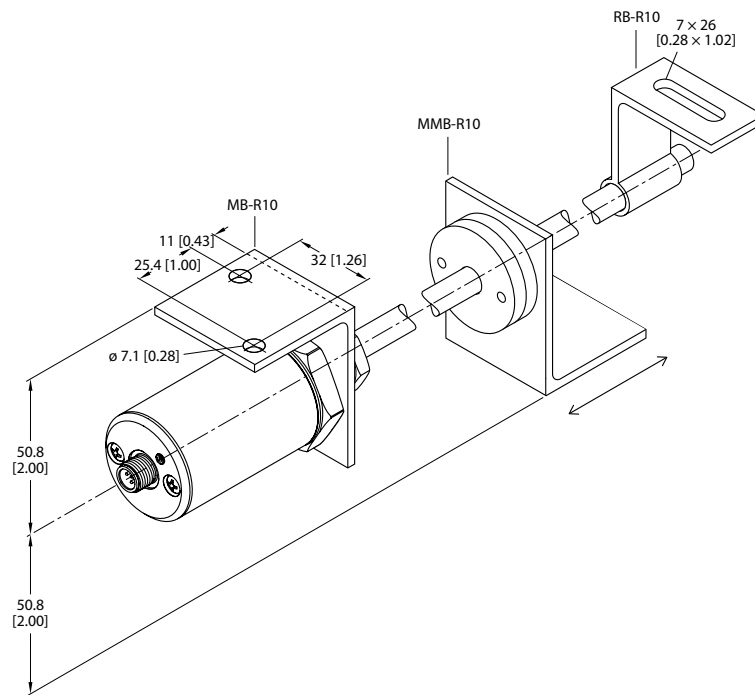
Mounting the device with mounting brackets (dimensions in mm)
